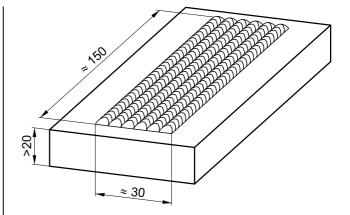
Test specimen for the welding of hardsurfaces
